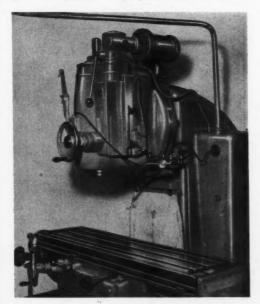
Steplessly-variable down feeds can be applied to the spindle quill on the Köpings type VF 20 vertical milling machine by a d.c.-motor and gearbox built into the cutter head
